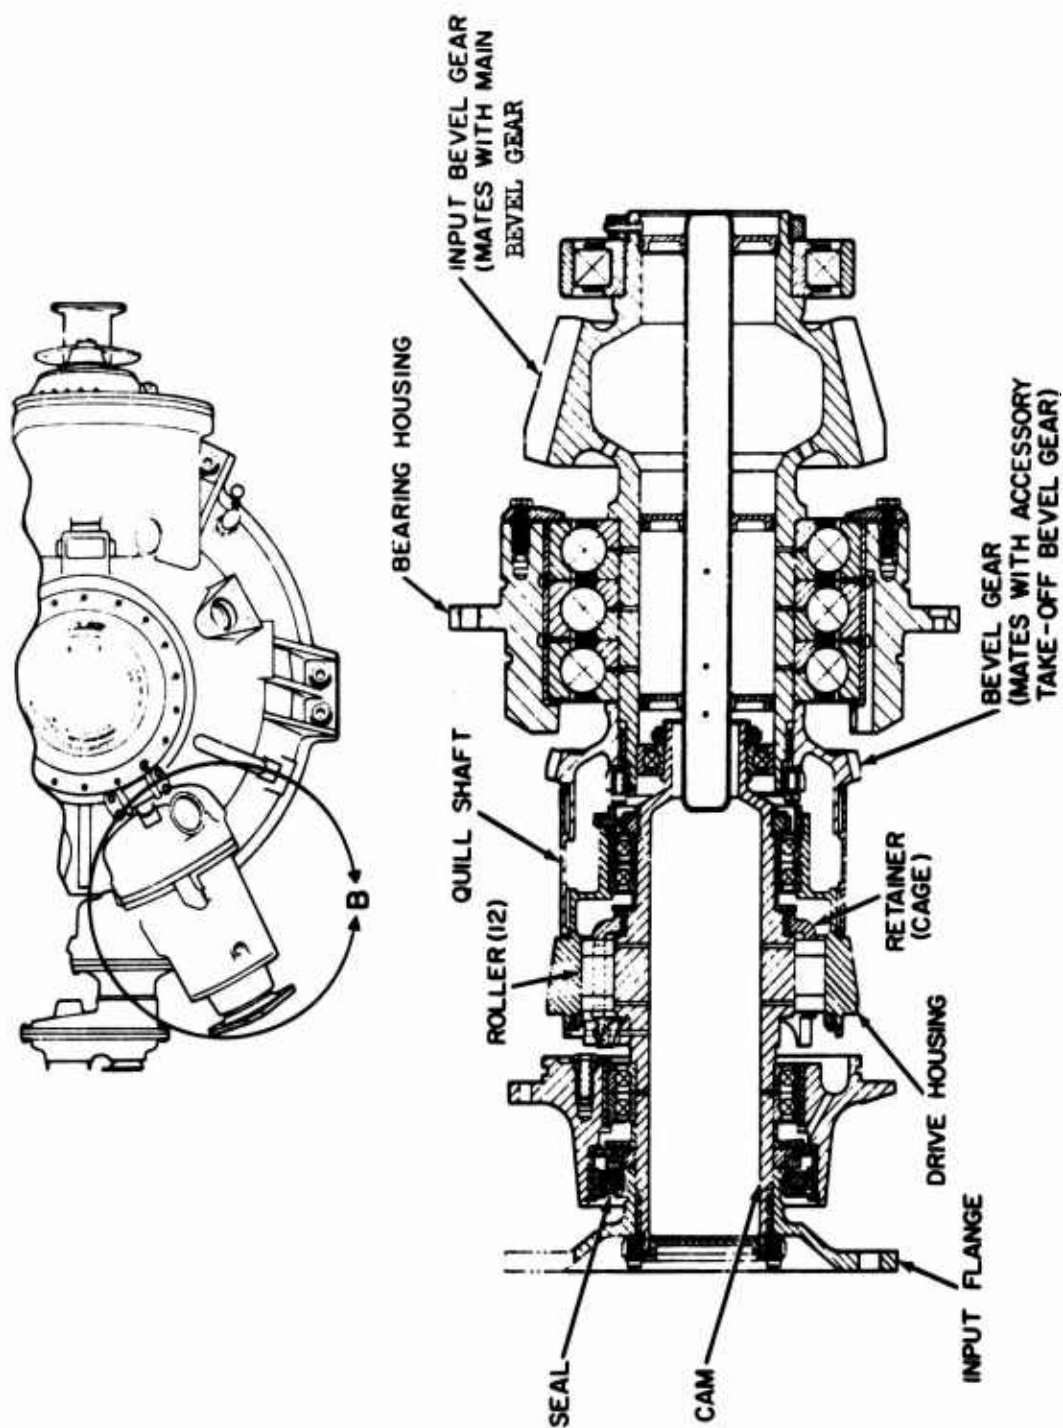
CH-53 Main Gearbox Input Freewheel Unit and Bevel Gear (Left Shown - Right Similar).
